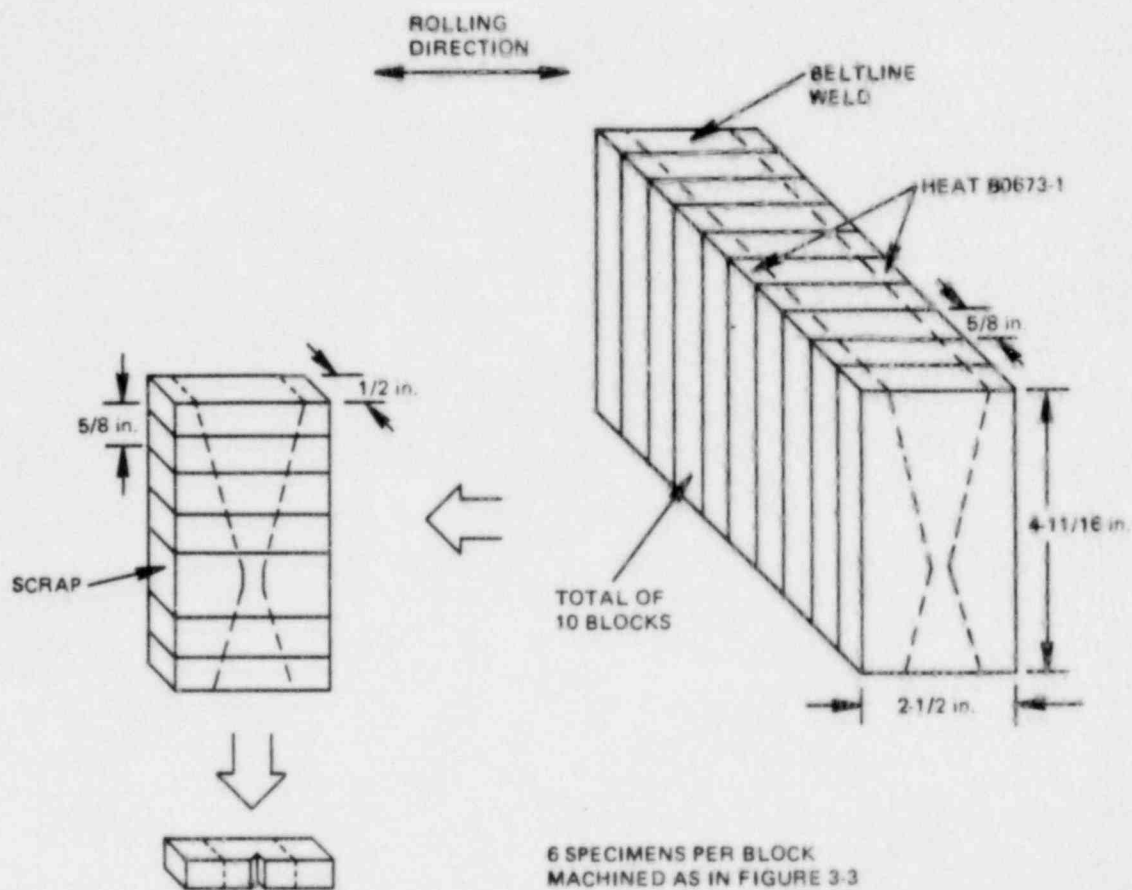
Fabrication Method for Weld Metal Charpy Specimens
